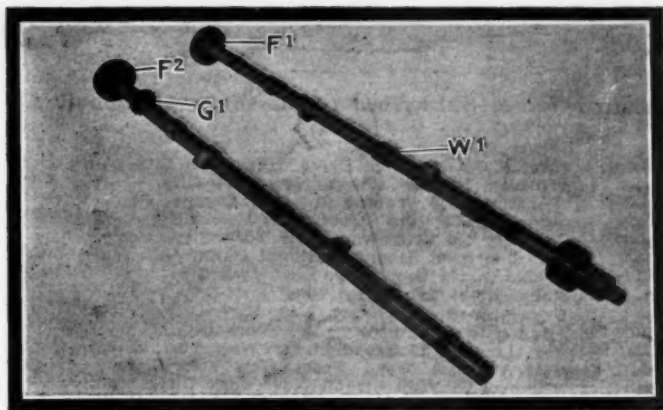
Inlet and exhaust cams with integral flanges to accommodate the driving gears and the cams cut integral
